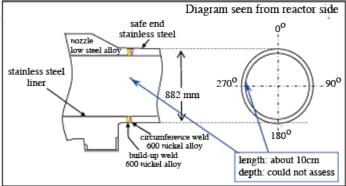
Location of crack in reactor vessel nozzle of Ohi-3
